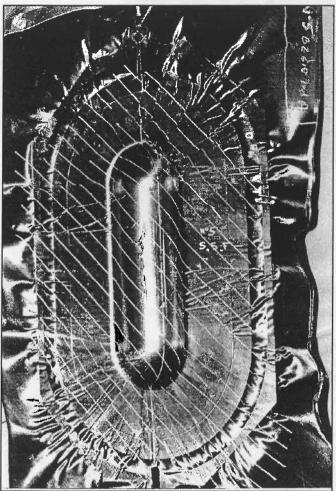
Top view of the quasi-isotropic APC2-AS4 part formed without blankholder.
